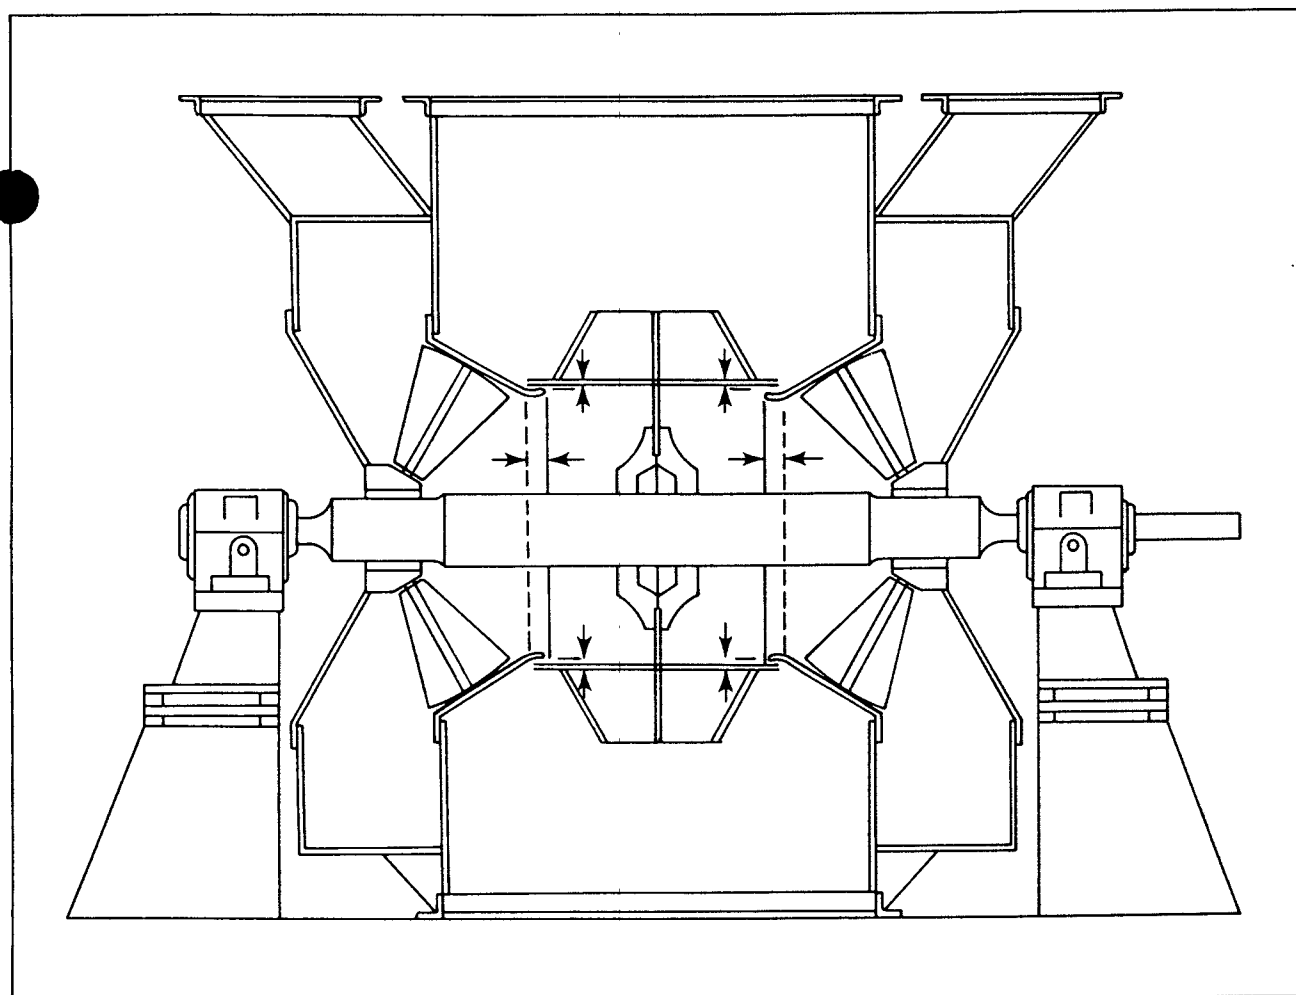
Typical Cross Sectional View of Fan
